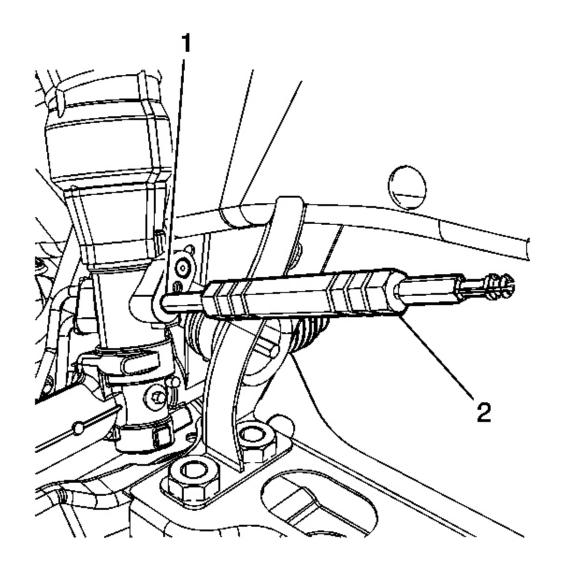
Installing Replacement Steering Gear Oil Seal Courtesy of GENERAL MOTORS CORP.
